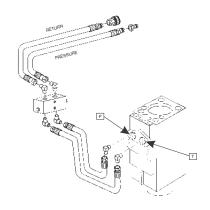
B. Connecting Hydraulic Lines Mini-Ex and Skid Steers (With Valves)
